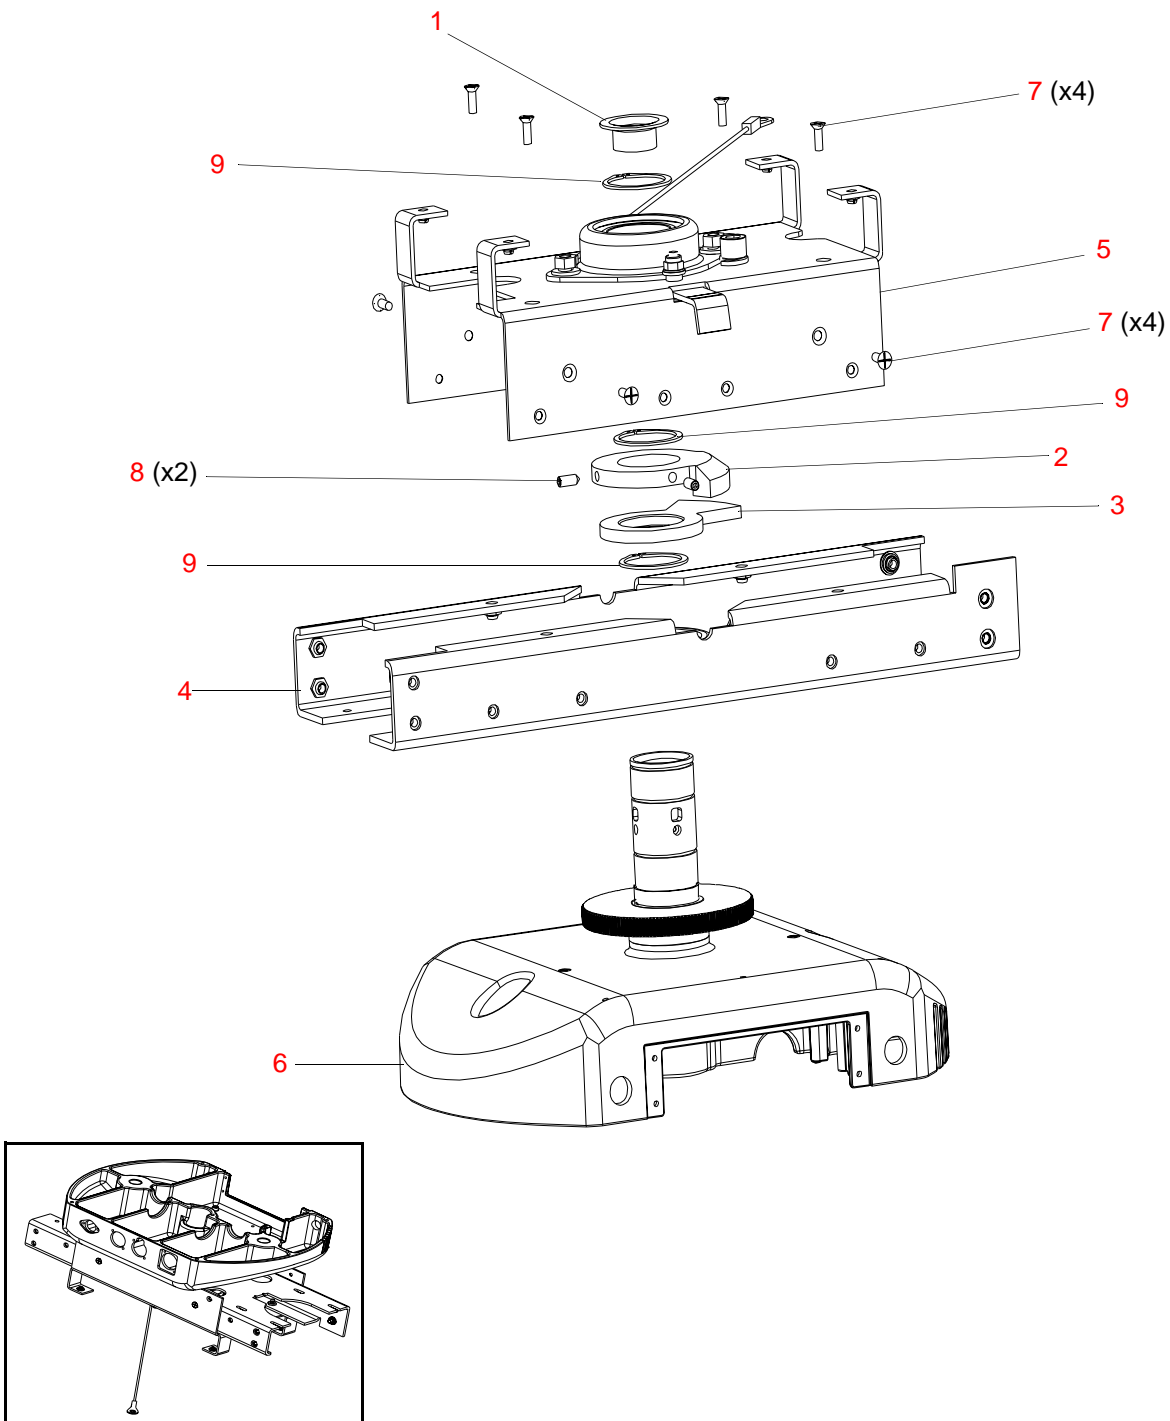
Yoke Crossmember Assembly (VL500 80V)
